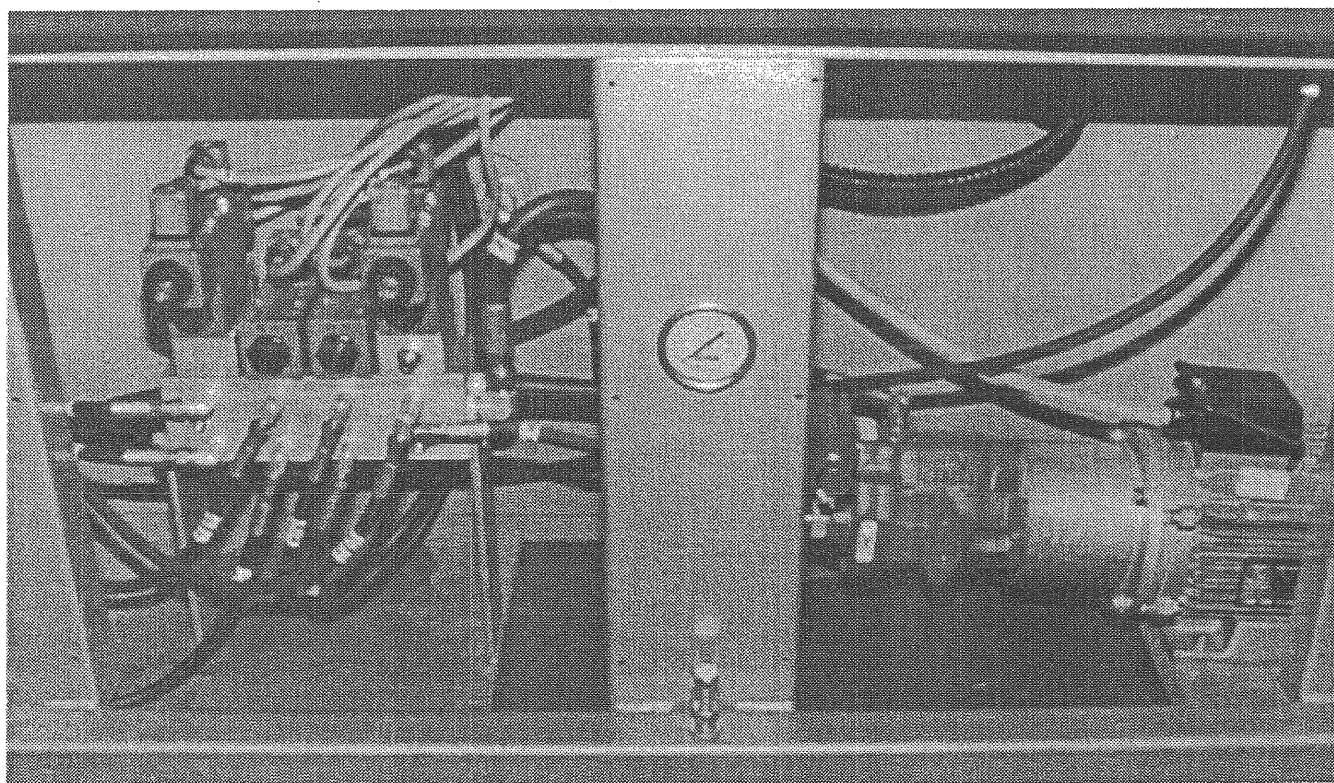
Hydraulic Pump and Manifold Assembly
